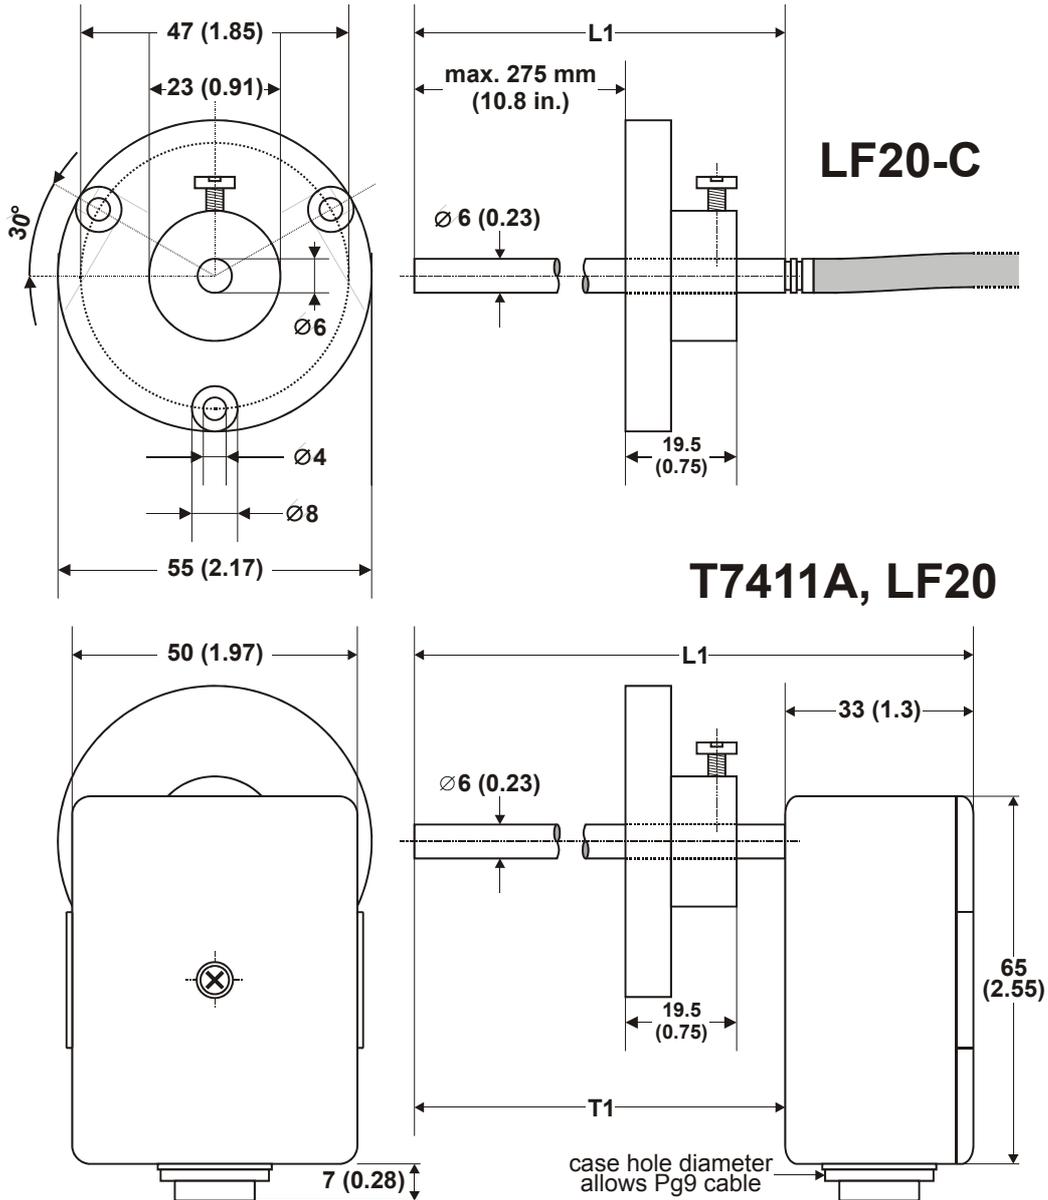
Dimensions of T7411A / LF20 and LF20-C in mm (inches)
